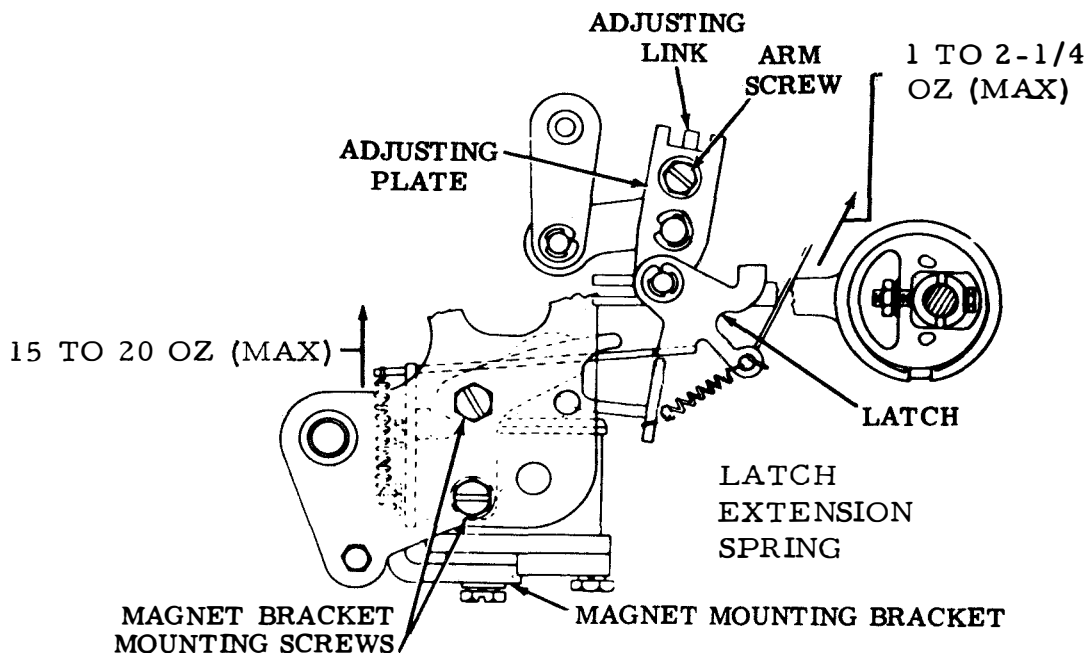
Armature Spring, Latch Extension Spring, Magnet Mounting Bracket, and Adjusting Plate
